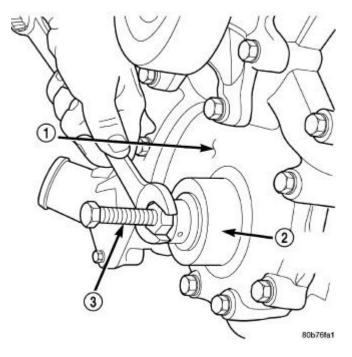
Crankshaft Front Seal Installation Courtesy of CHRYSLER LLC
